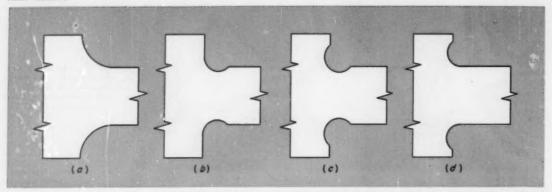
Typical fillet configurations for rolling. Styles b, c, and d are preferred to style a. Undercut style d must be ground on an angular-wheelhead grinder but when fillet rolled, requires no roll burnishing to smooth the transition.
